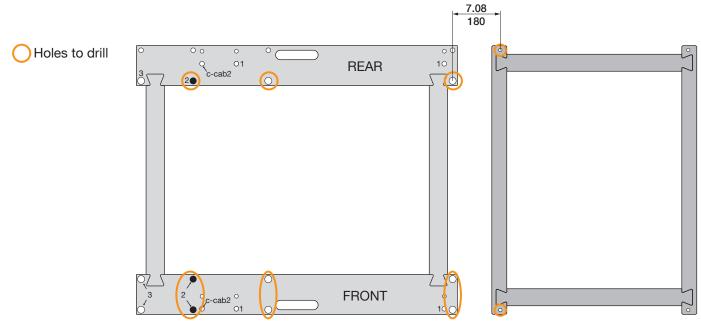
Holes to prepare B-Cab installation next to the C-Cab
